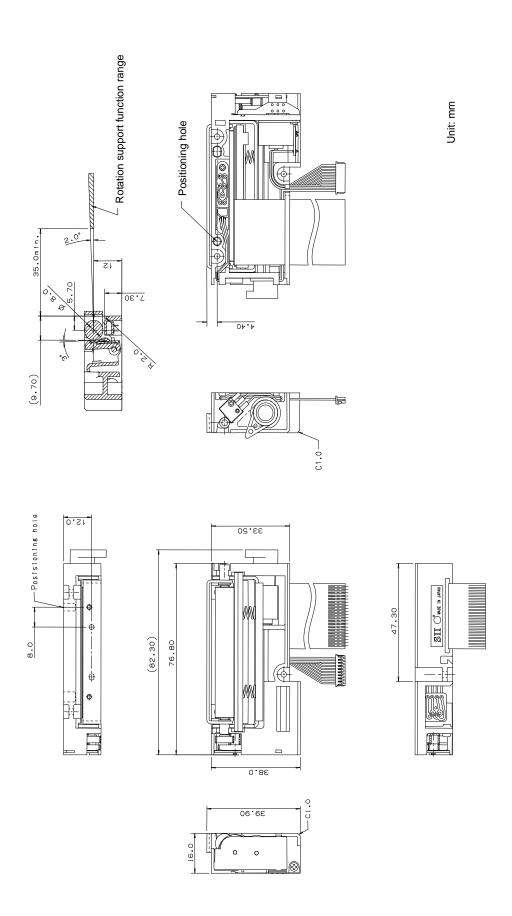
Appearance and Dimensions (LTPH245E-C384-E)
